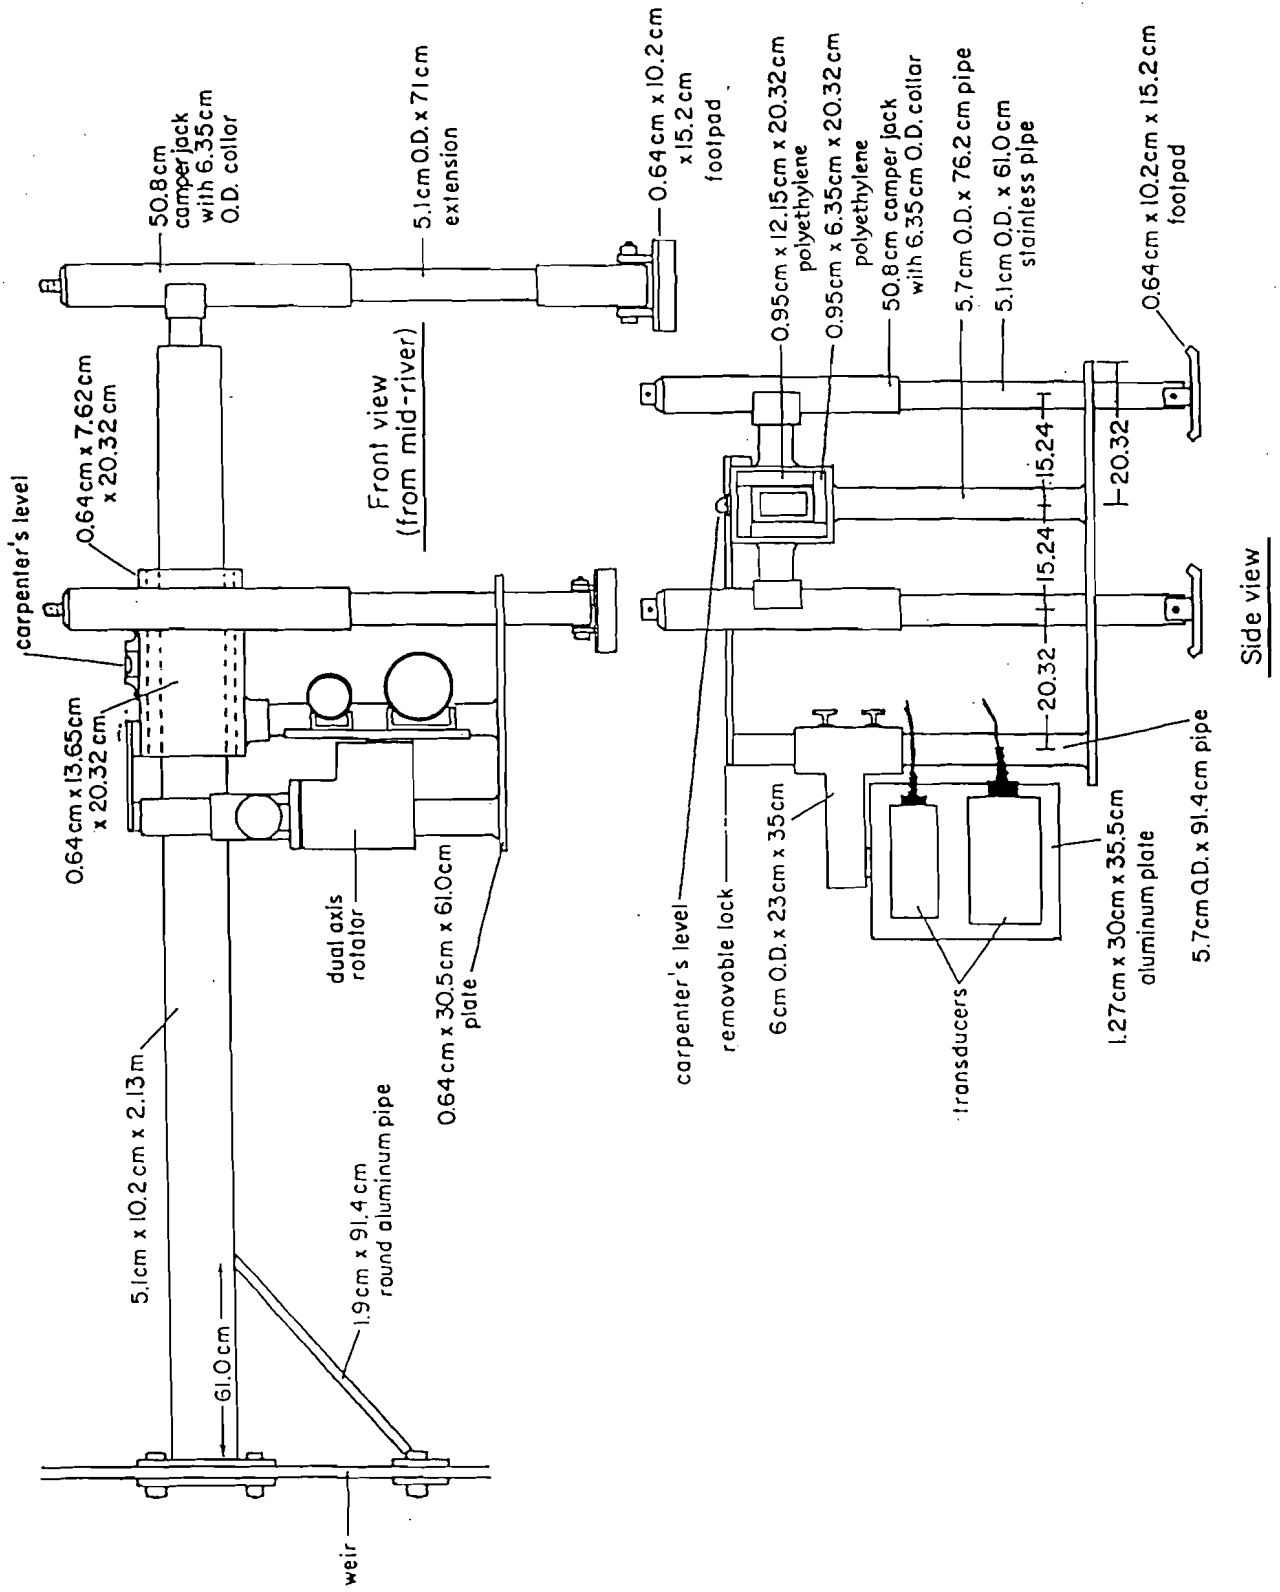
Schematic of the transducer to weir bracket showing a front view of the main horizontal section and transducer assemblage. The side view shows the transducer assemblage alone.
